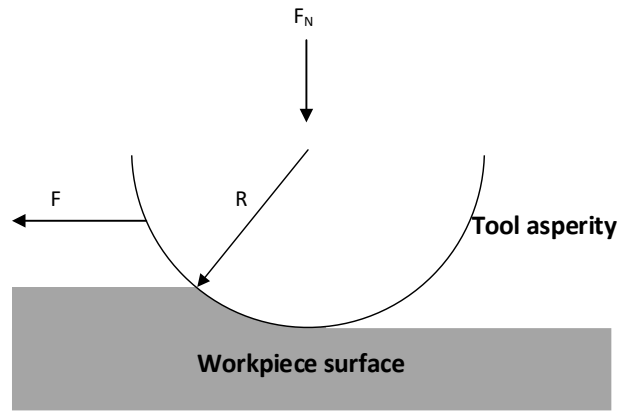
Penetration of hemispherical hard tools while plowing soft workpieces
